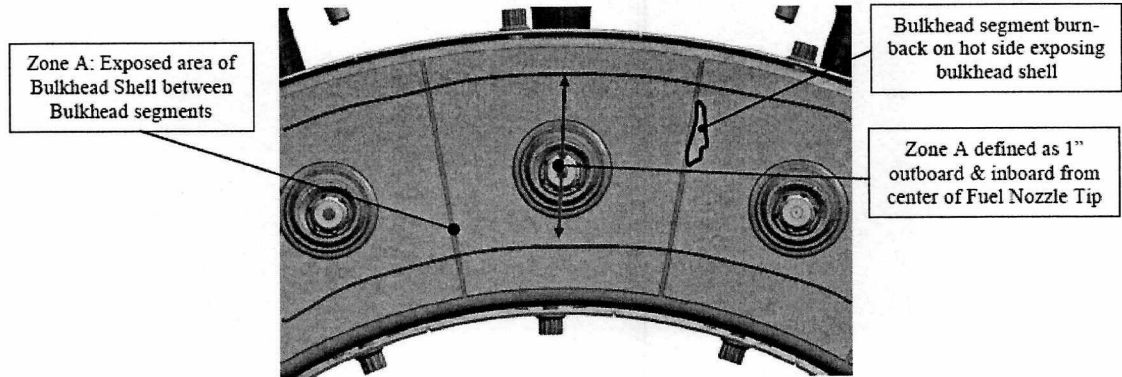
Bulkhead Shell Area Definition, Combustor Hood Removed for Reference - (Applies to cold side of part and hot side of part (shown))
